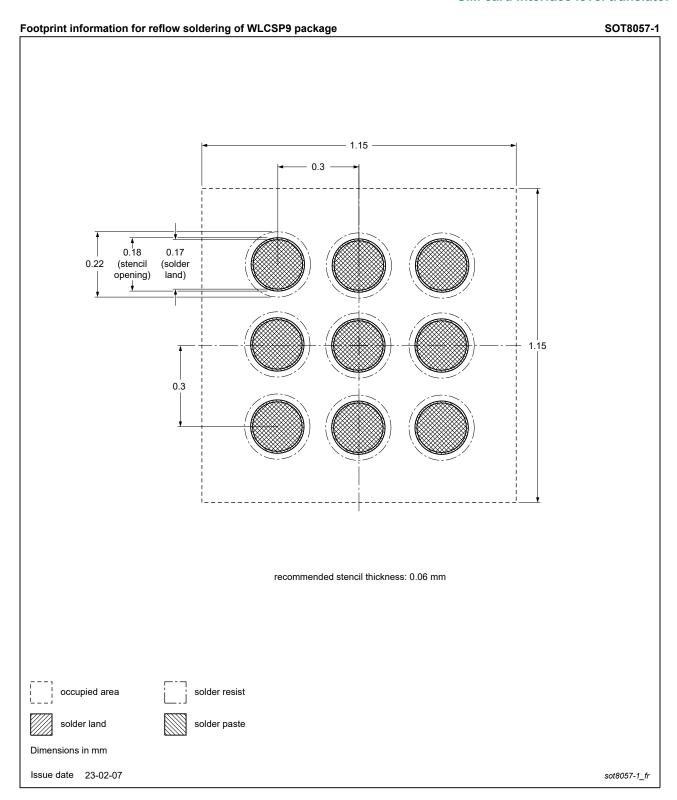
Reflow soldering footprint SOT8057-1 (WLCSP9)
